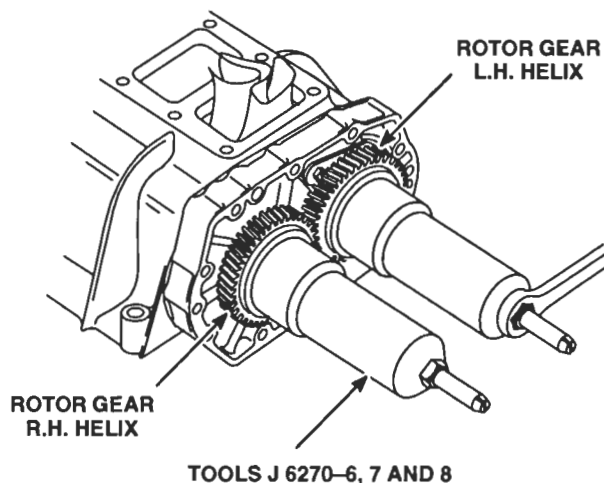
Installing Rotor Gears on Rotor Shafts for Preliminary Check of Clearances
